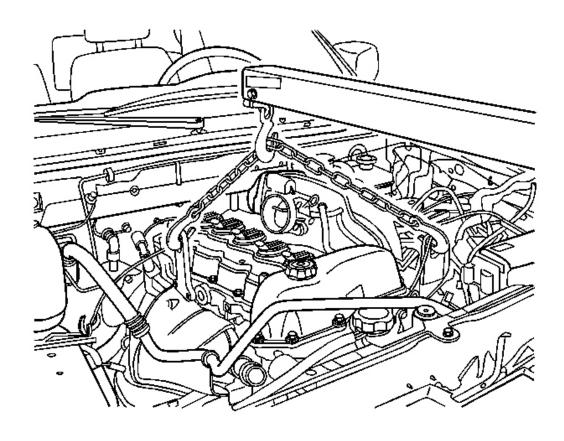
View Of Engine Lift Chain Courtesy of GENERAL MOTORS CORP.
